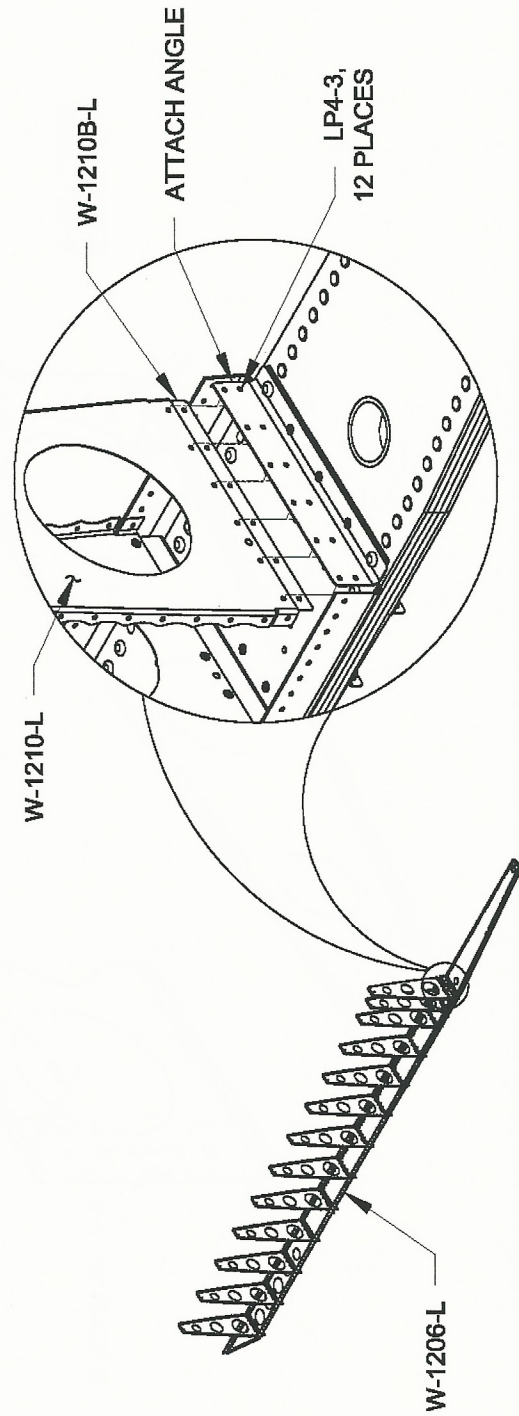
ATTACHING THE MAIN RIB AND DOUBLER
